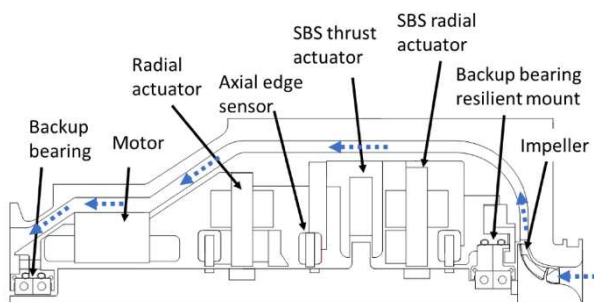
Cross-section of magnetically levitated blower used in the ISS CO₂ removal assembly.
